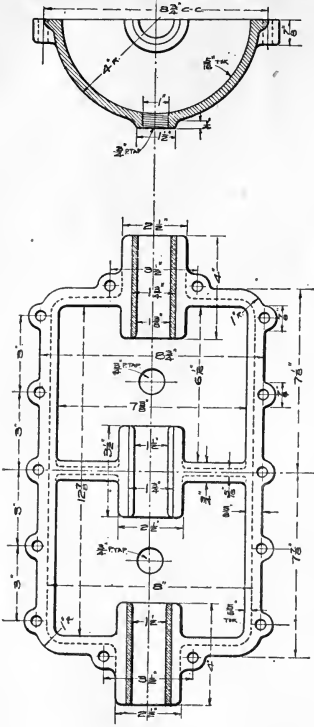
DETAIL OF LOWER HALF OF CRANK CASE.
